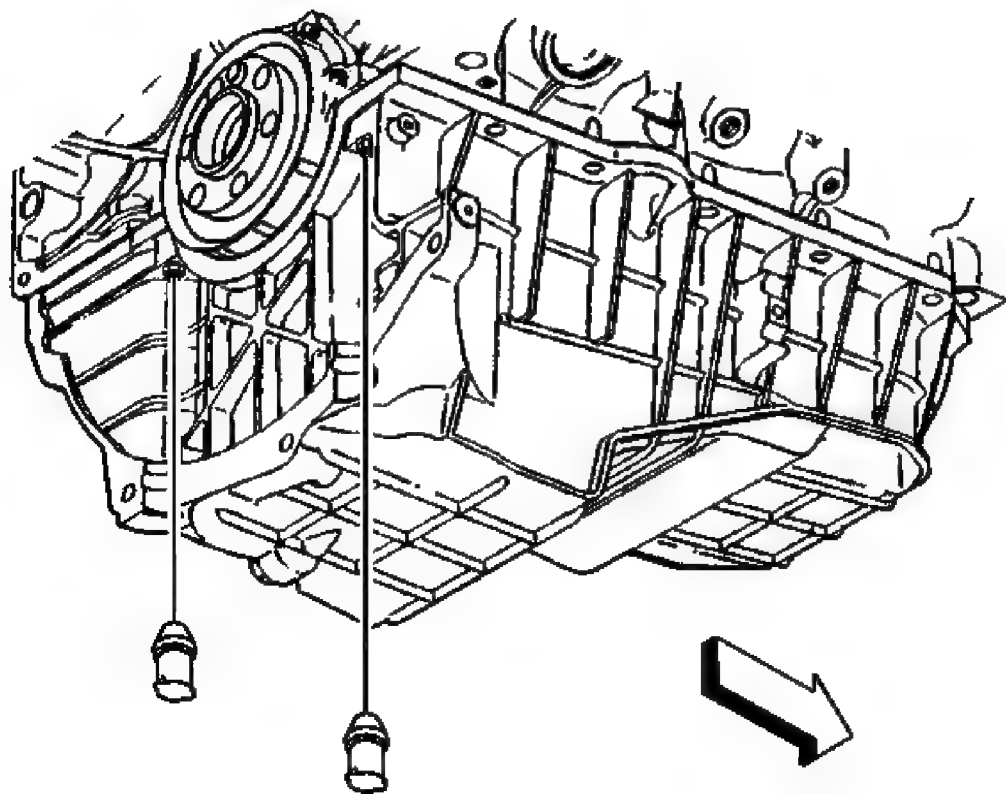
Locating Access Plugs For Oil Pan Rear Nuts
